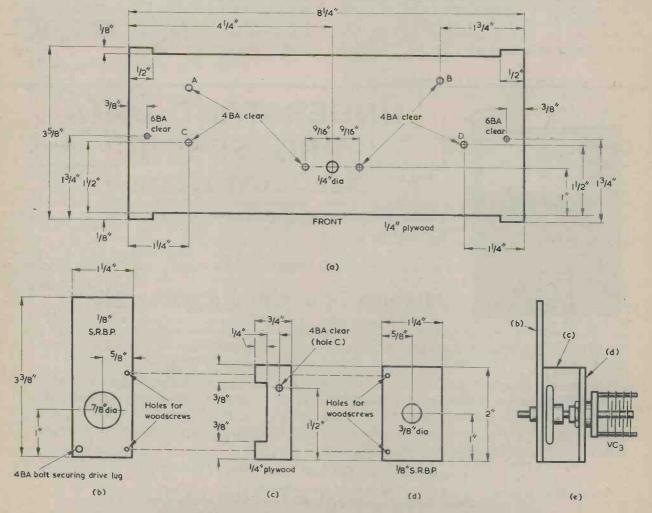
(a). Baseplate of the tuner. This is secured to the top of the amplifier case by screws passing through the two 6BA clear holes, with nuts on the top (b) (c) (d) (e). Mounting assembly for VC3 and its epicyclic tuning drive
